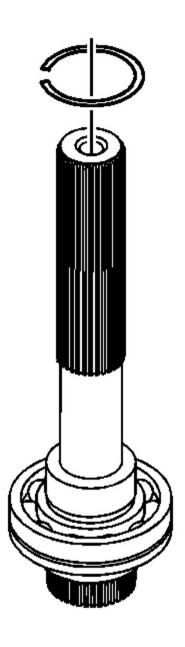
Retaining Ring & Rear Output Shaft Bearing Courtesy of GENERAL MOTORS CORP.
